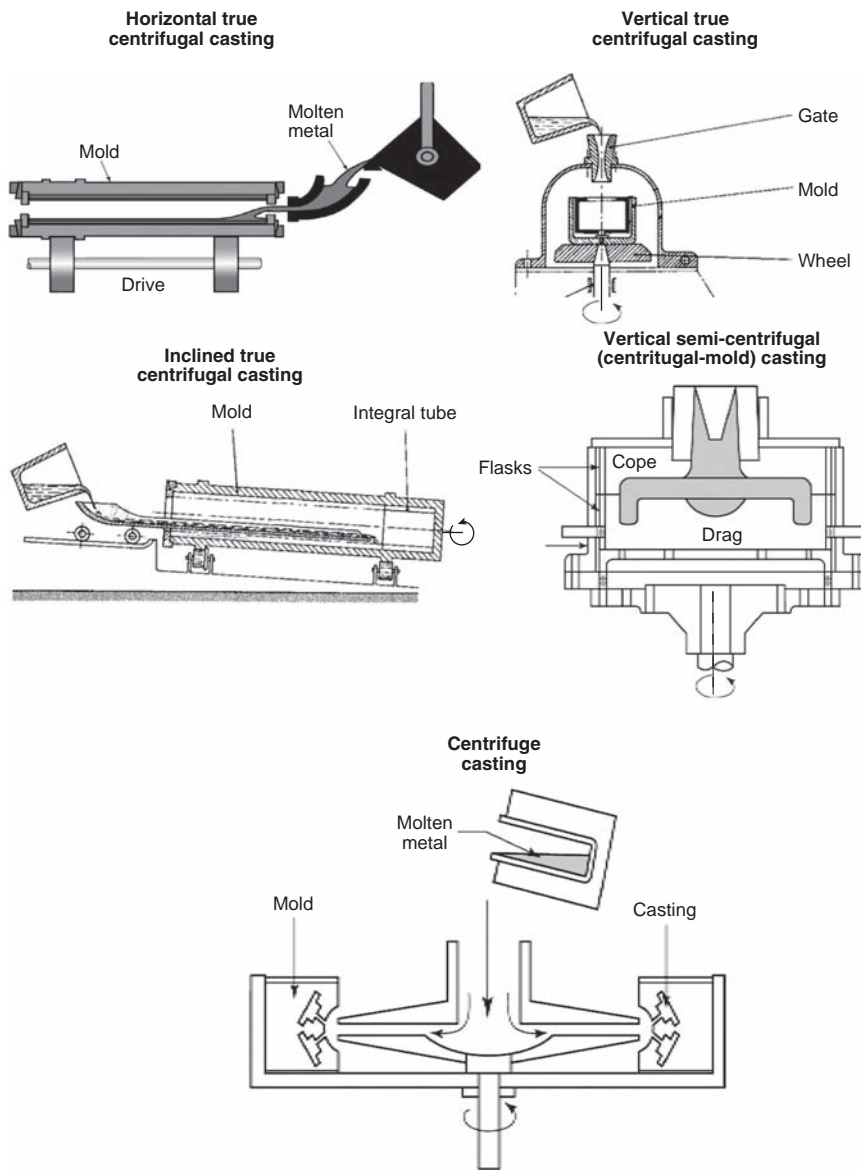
Methods of casting with rotating molds. True centrifugal casting (top row) can be horizontal, vertical, or at an incline. Semicentrifugal and centrifuge die casting are vertical methods with molds that can be designed to produce solid parts.
